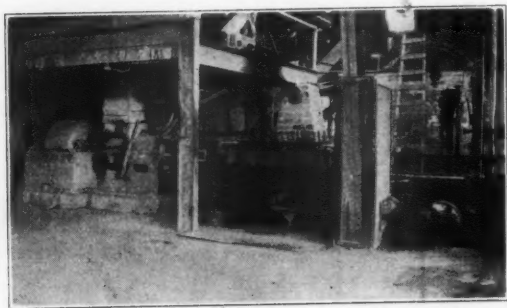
MACHINE FOR MOLDING CUPOLA BLOCKS
